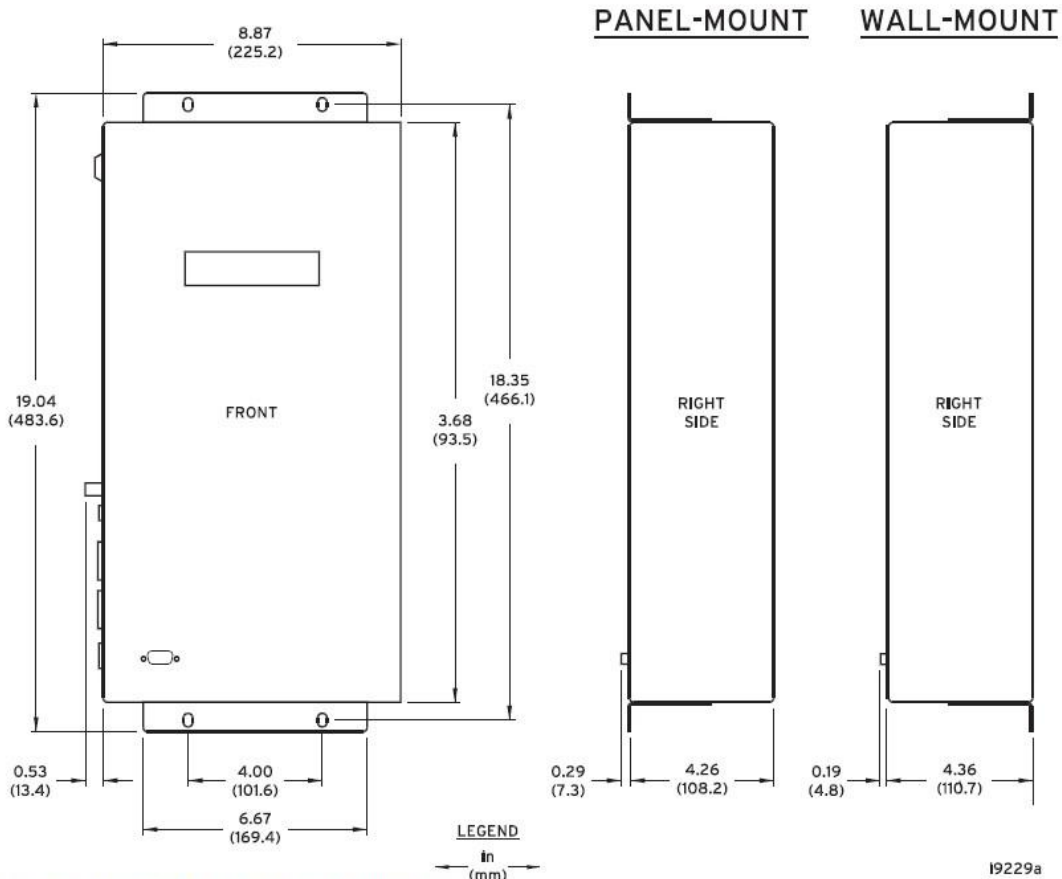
SEL-351RS Kestrel Control Module Dimensions
